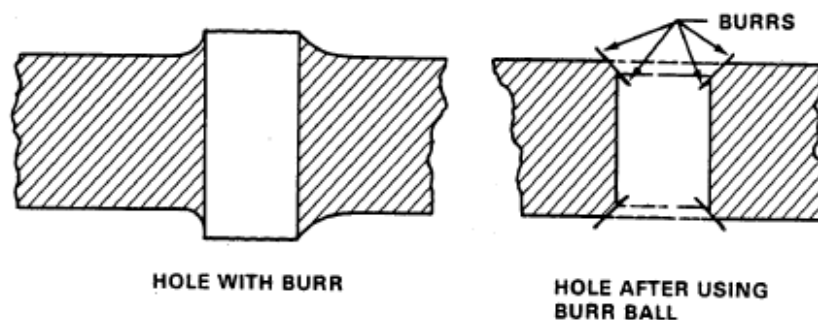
Smaller Burrs Produced by Burr Balls and Countersinks
